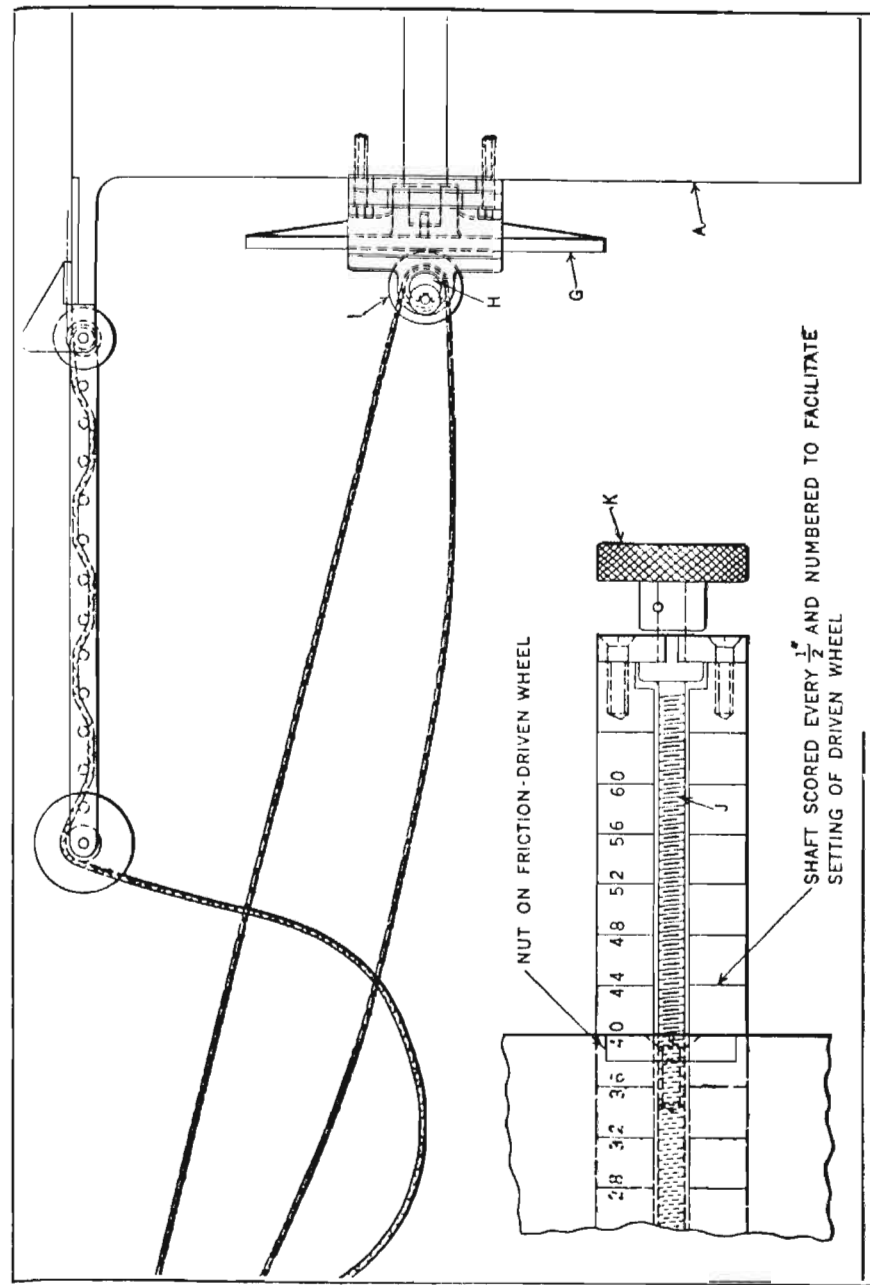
Wire-feed Driving Mechanism which Transmits Motion through a Sprocket and Chain Transmission to the Feeding Sheaves, Fig. 12
